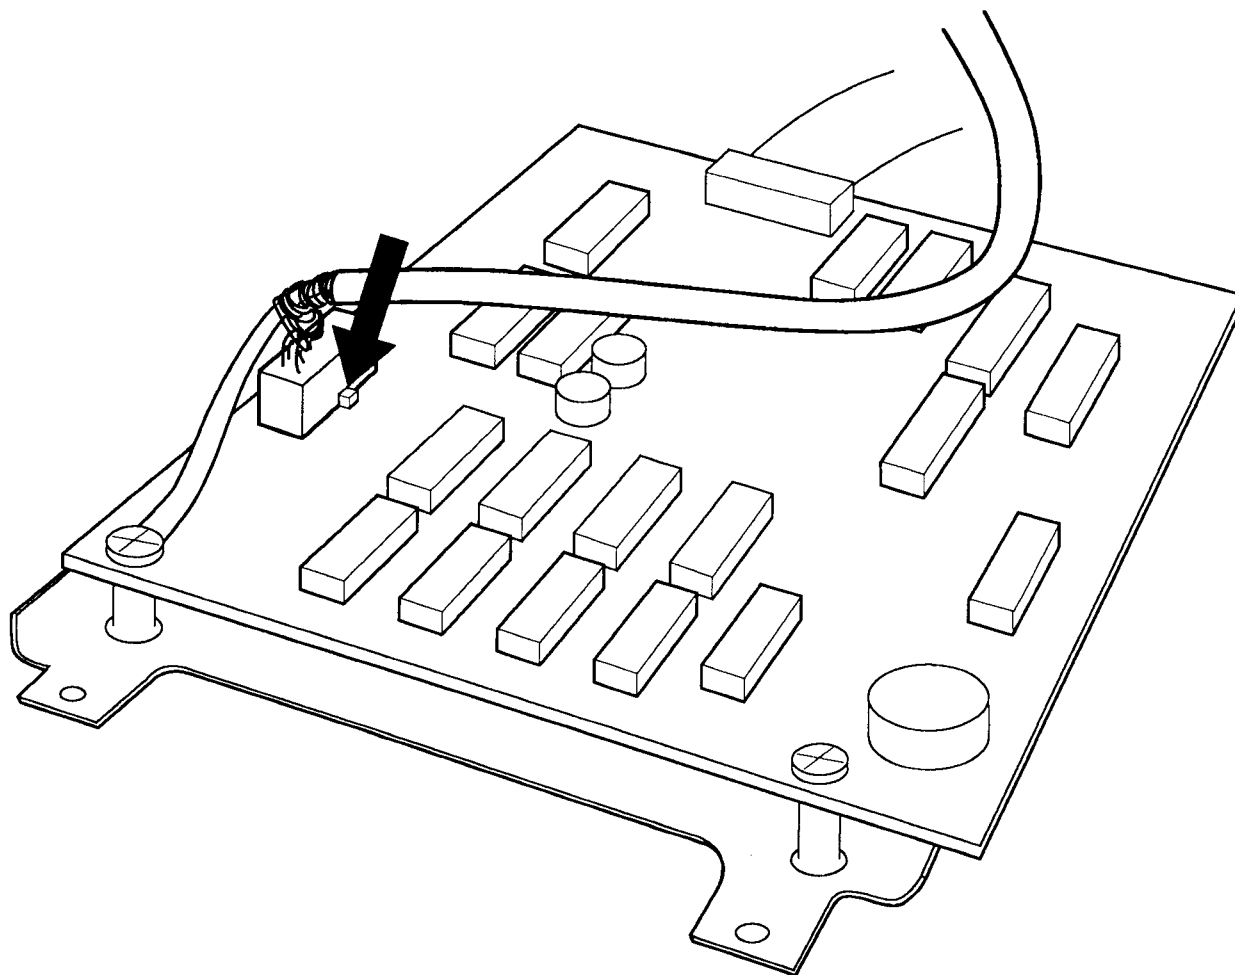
Orienting connector J933 for installation on the keypad board.
